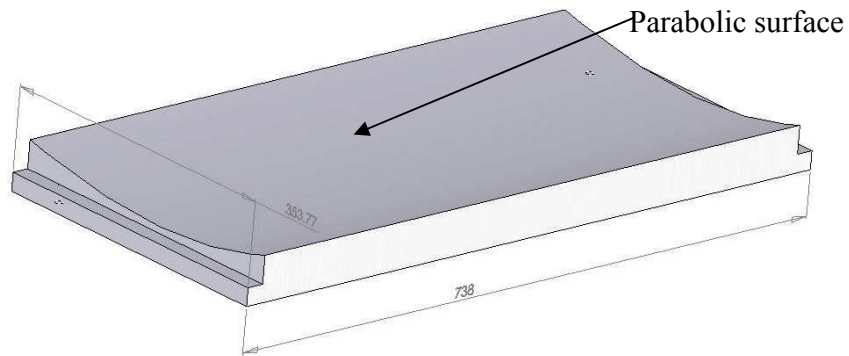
3D sketch of the reflector 2 support, all dimensions in 'mm'
